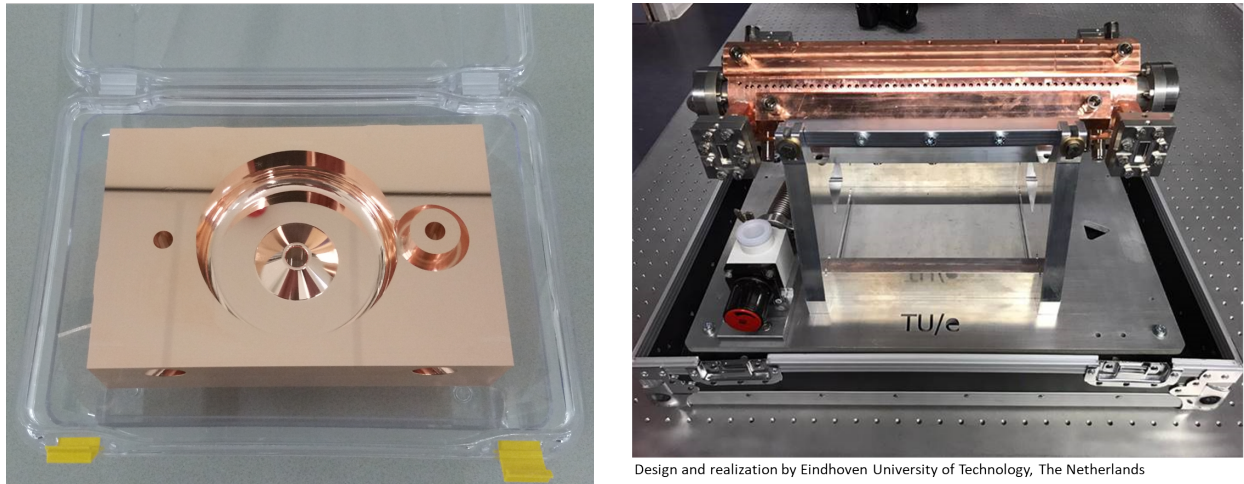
Transport tools for mono-parts off-the-shelf available membrane boxed can be used (left) while for (sub)assemblies more dedicated tooling has to be developed (right).
